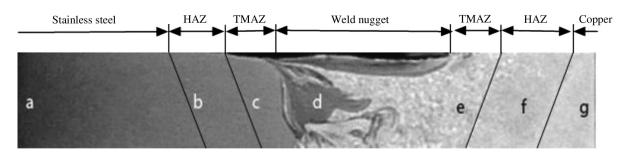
Macroscopic overview of the cross-section of the friction stir welded pure copper to 316L stainless.
